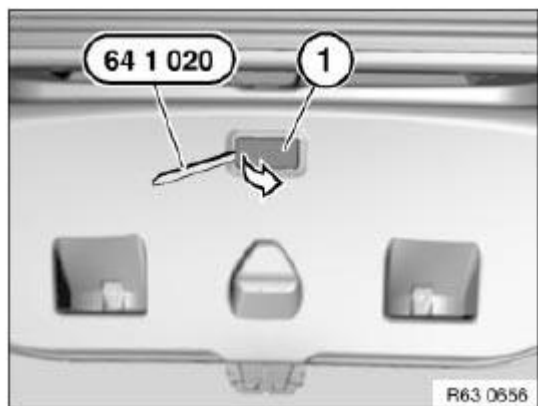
Identifying Special Tool (64 1 020) And Luggage Compartment Light (Rear Lid)
